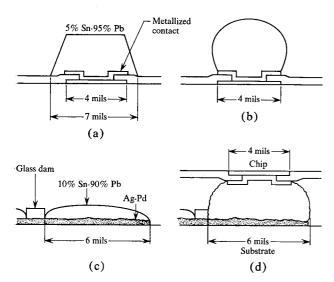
Construction of solder interconnection: (a) chip after solder evaporation; (b) chip after first reflow; (c) tinned substrate; (d) complete contact after joining.
